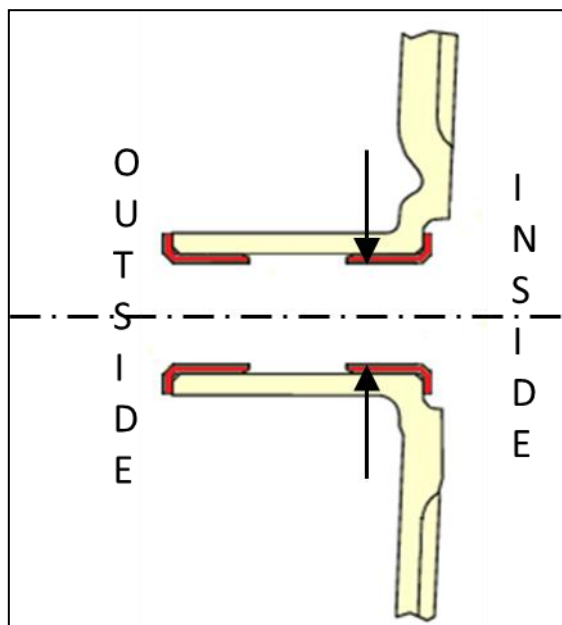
Bush Internal Diameter (*Engine Manufacturer*)
